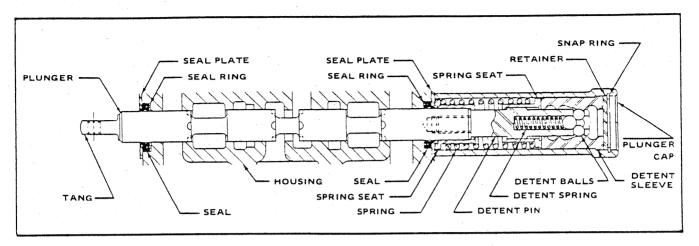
Double Acting - Spring Centered Detent Positioned Plunger (Hydraulically Balanced)
